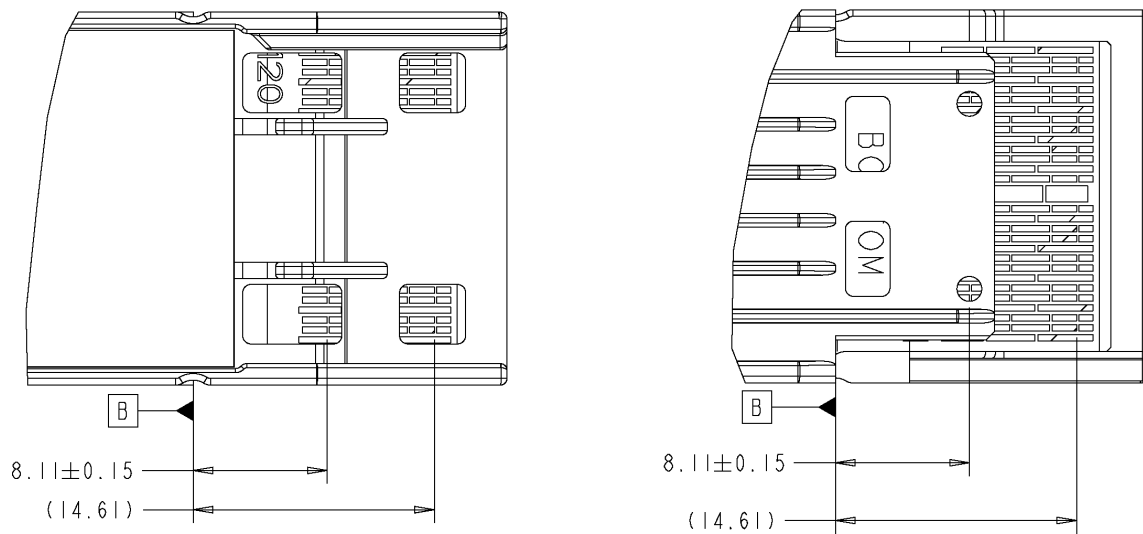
Signal pad location to module (left: top view, right: bottom view)
